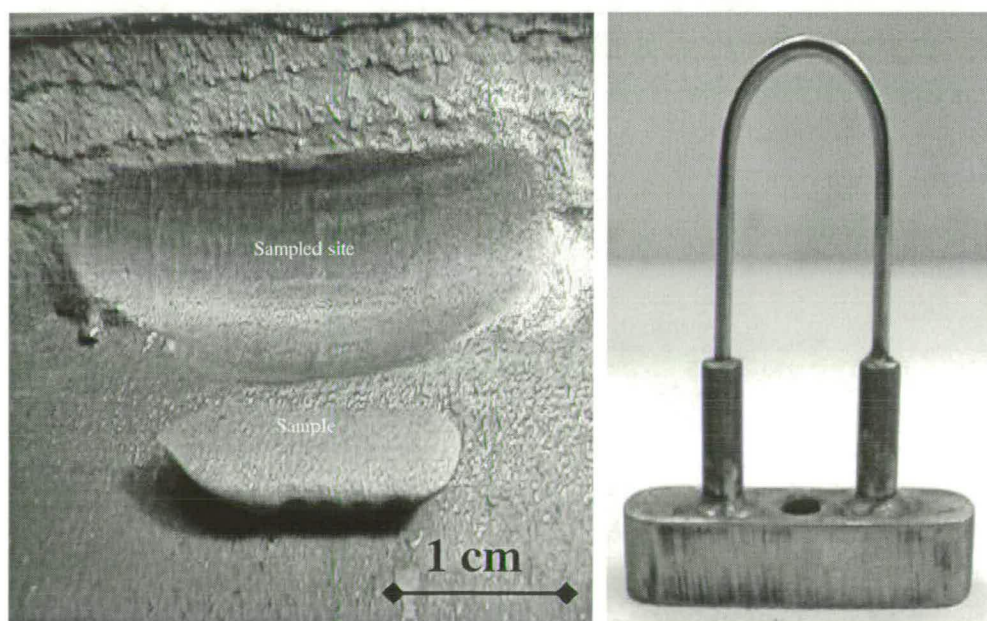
Sampled site in welded toe section and removed sample (on left) and “U-shaped” ECM sampling tool (on right)
